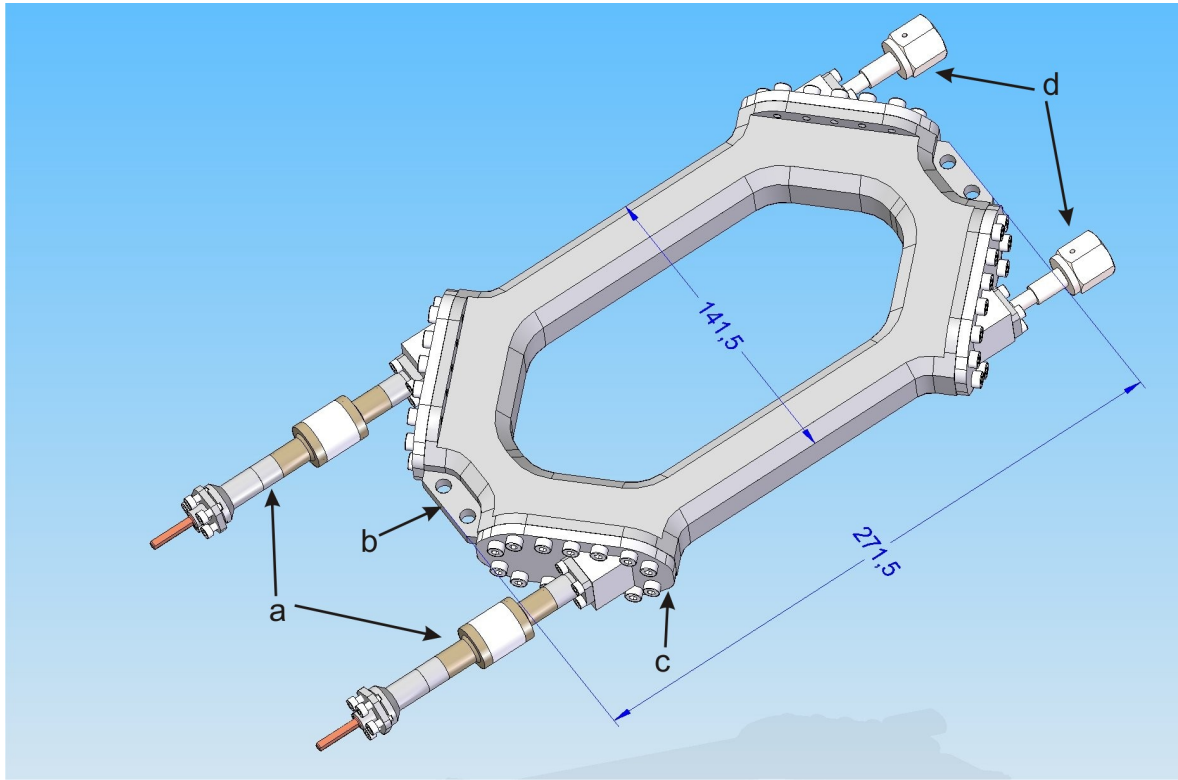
Test HTS coil assembly. a- current feedthroughs, b - alignment hold, c - mounting corner flange, d - cryogen couplings, dimensions in mm.
